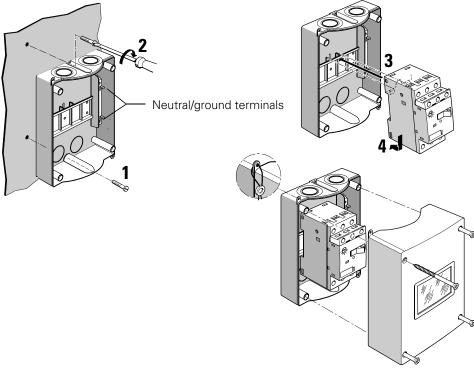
Molded-plastic surface mount enclosure (frame size S00)
